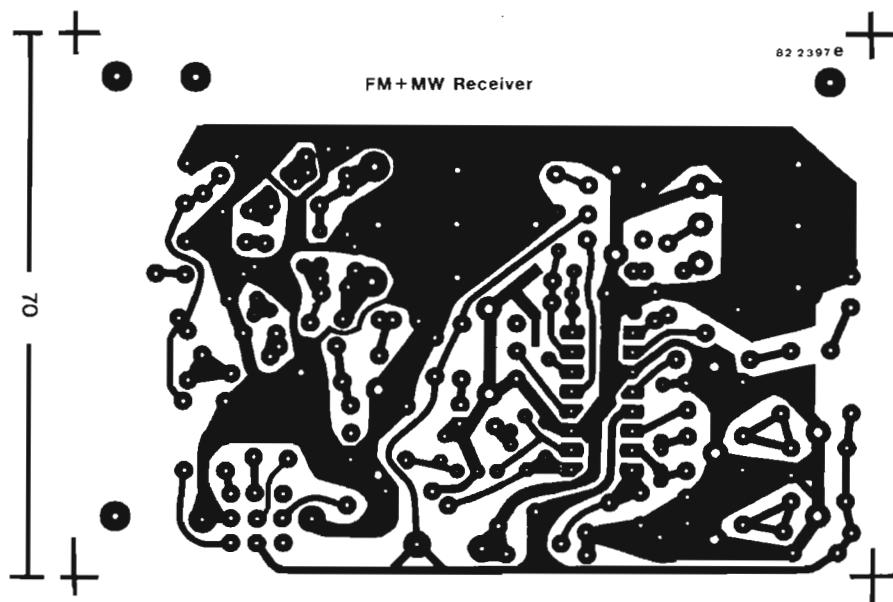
Layout of circuit board (soldered side) of the FM-/AM-receiver
